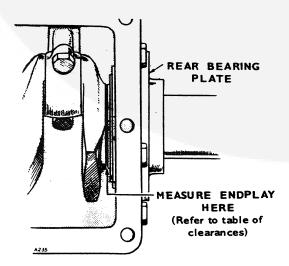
MEASURING CRANKSHAFT ENDPLAY
